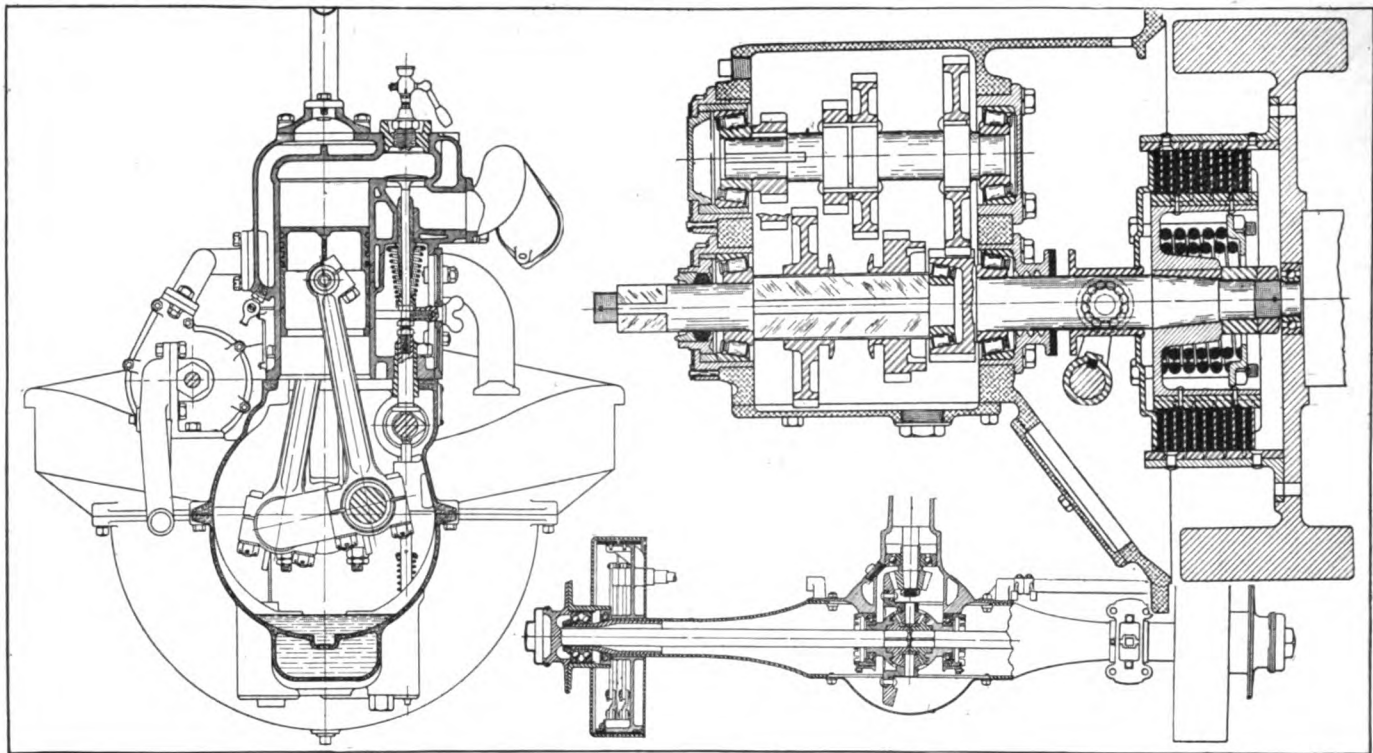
Showing cross-sections through the new Gilde motor, clutch, gearset and rear axle
